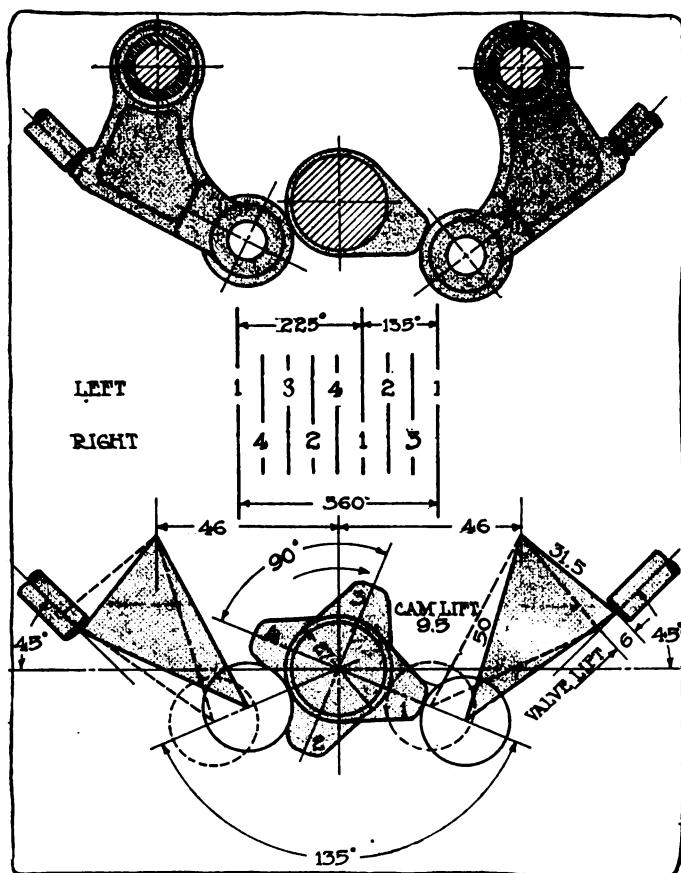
Layout of valve mechanism showing that the spread between cams of the cylinders firing in sequence must be 135 degrees
